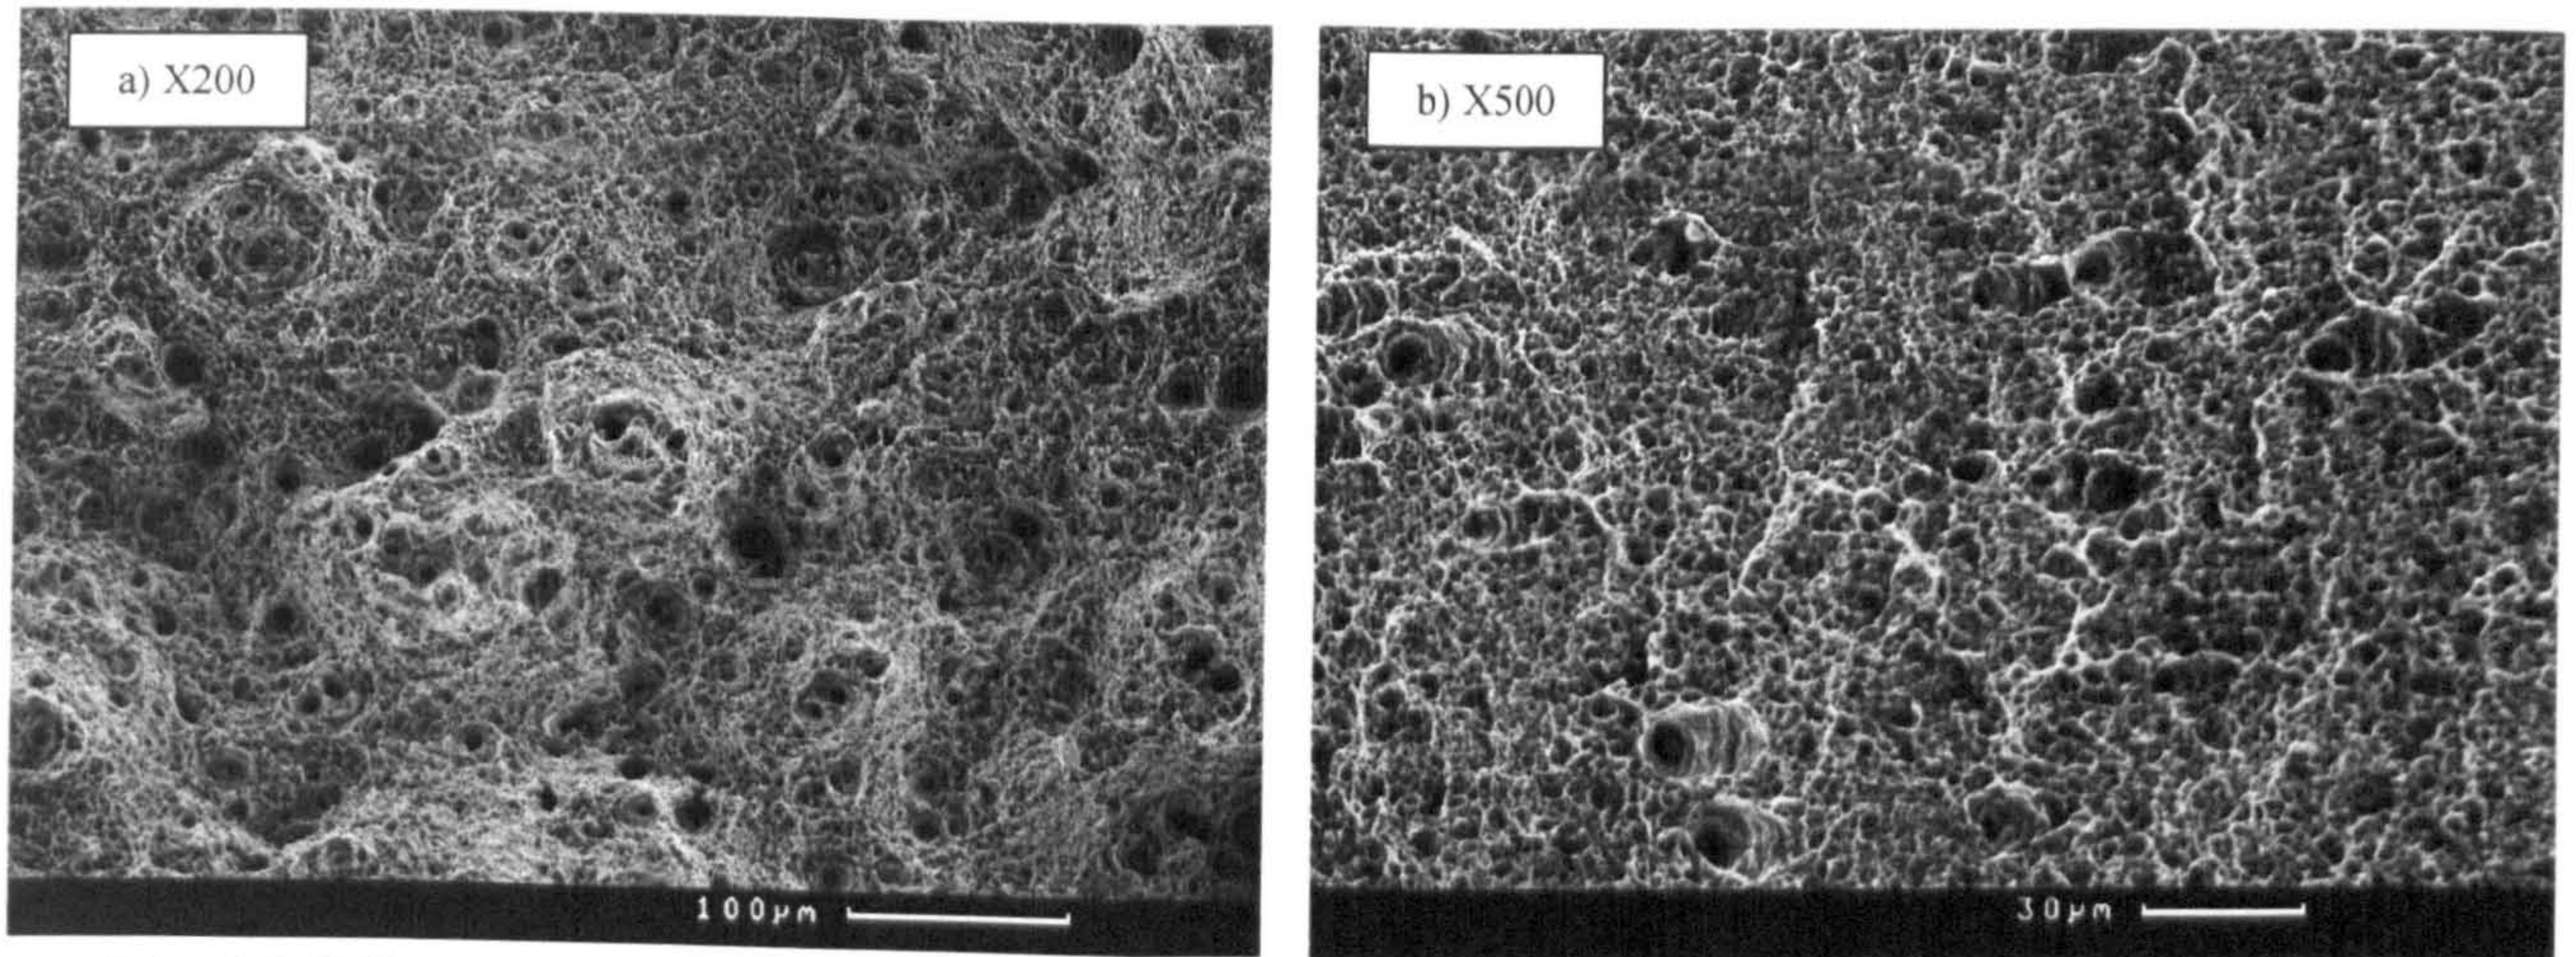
SEM fractography of tensile specimen in 45 direction: a) close up of the flat fracture in the centre zone and b) close up of the shear fracture in slanted zone
